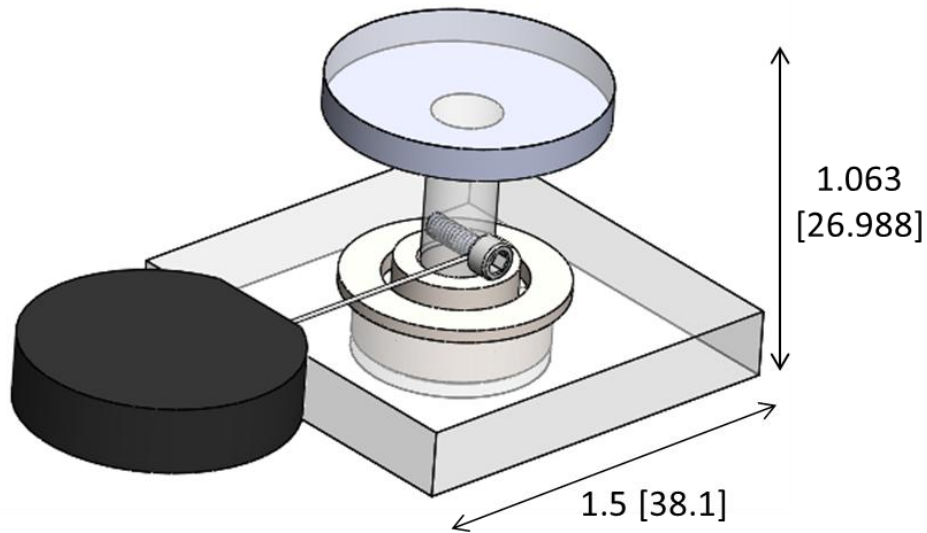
The spring-loaded spool holds the excess cable when it is not wrapped around the gimbal spool. There is a constant force spring attached to this spool so that when there is loose cable it will be re-wound automatically. Dimensions in inches [millimeters].
